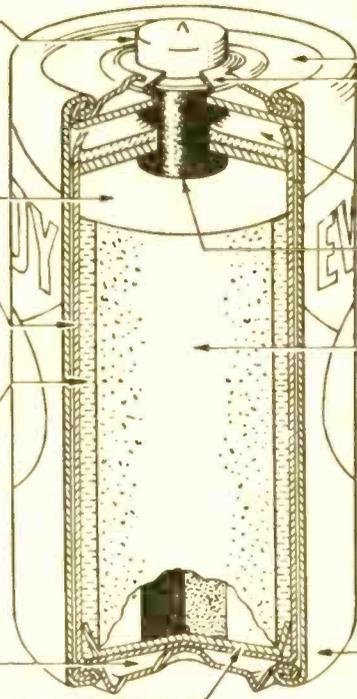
"Cut away" detail diagram of a typical flashlight dry cell.
